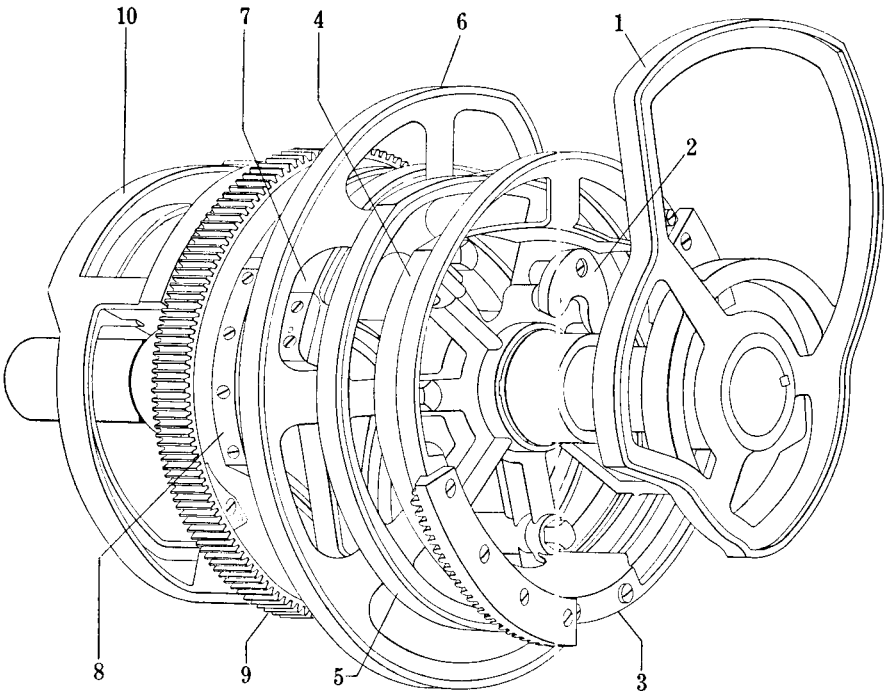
Cams assembled on the cam shaft. The cams are numbered, beginning from the right toward the left, as viewed from the rear of the machine. 1 is the first elevator cam, 2 the distributor shifter cam, 3 the mold turning cam, 4 the vise closing cam, 5 the justification cam, 6 the second elevator cam, 7 the pot pump cam, 8 the pot cam, 9 the mold cam and driving gear, 10 the delivery and elevator transfer cam.
